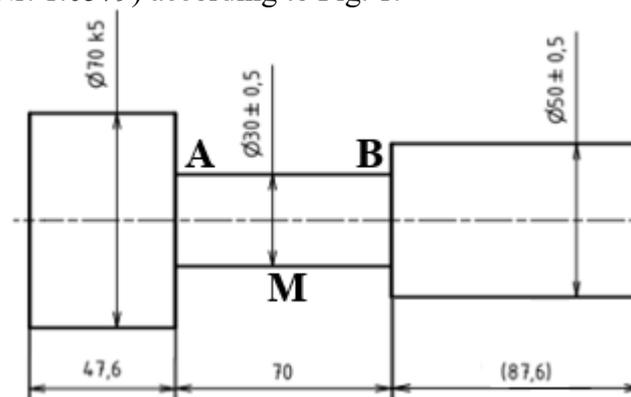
Drawing of the test shaft (cut-out from the drawing)
